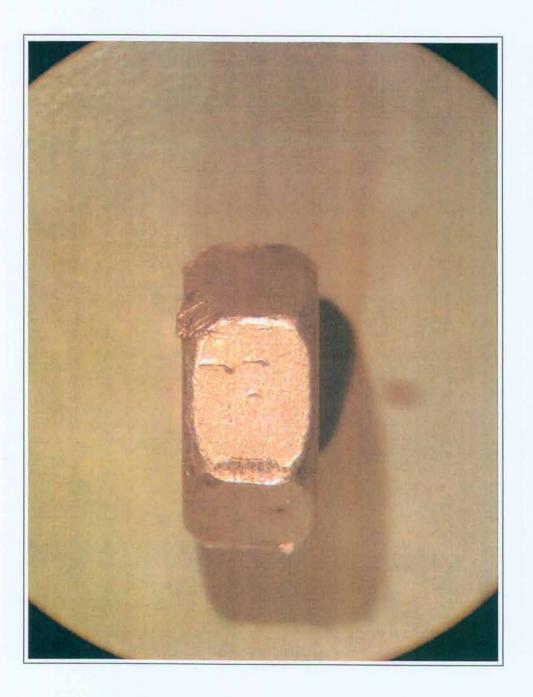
Mating fracture surface to Photograph 4a.
